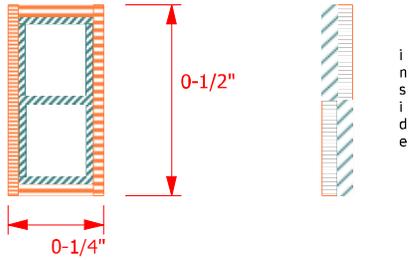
Drower Caboose interior wall - dimensions expressed in feet/inches down to 1/32-nd of an inch
